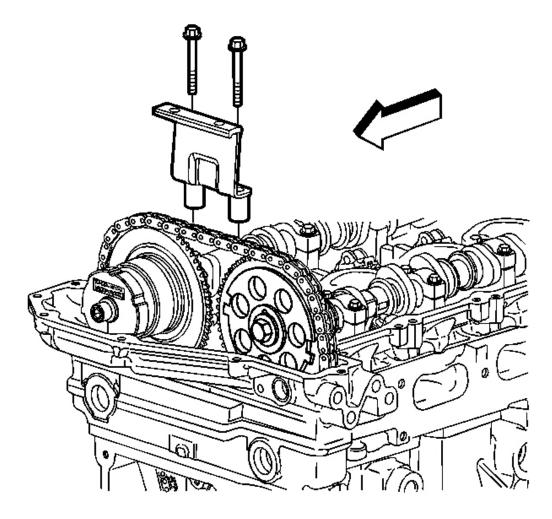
View Of Top Chain Guide Courtesy of GENERAL MOTORS CORP.
